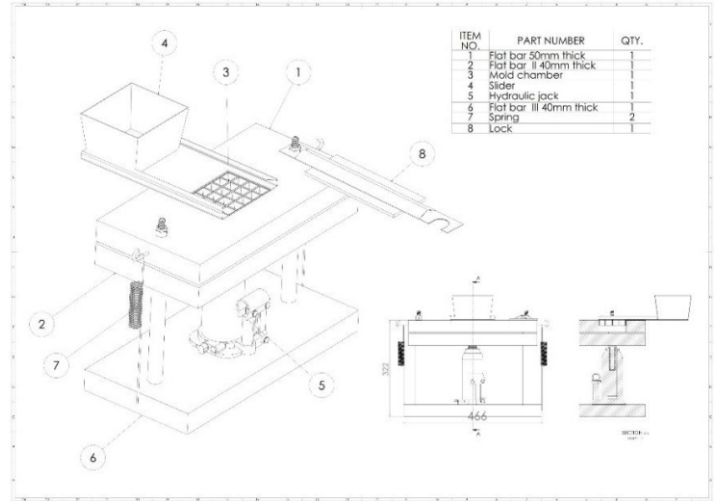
Assembly drawing of Manual hydraulic briquette machine
